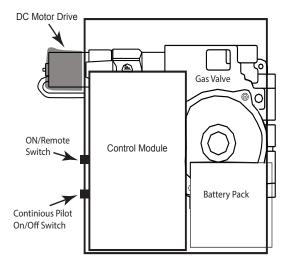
Shows side view of component parts inside the AFVK-SP-MHL valve kit.
